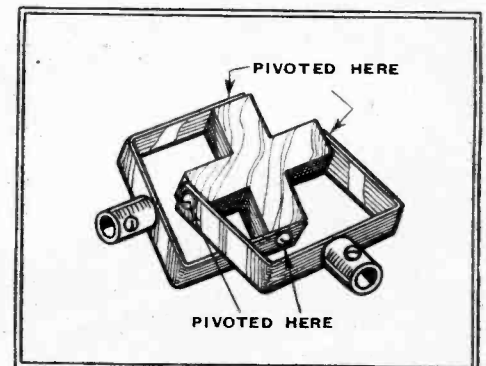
Universal coupling for spindles inclined to each other by angles between 180 and 145 degrees. The crosspiece may be of insulating material if necessary.
